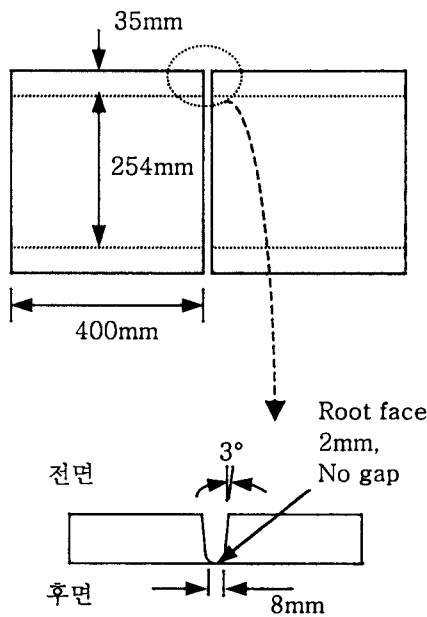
Test configuration for Narrow-gap TIG Welding
